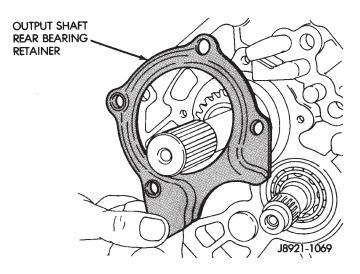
Removing Output Shaft Rear Bearing Retainer
